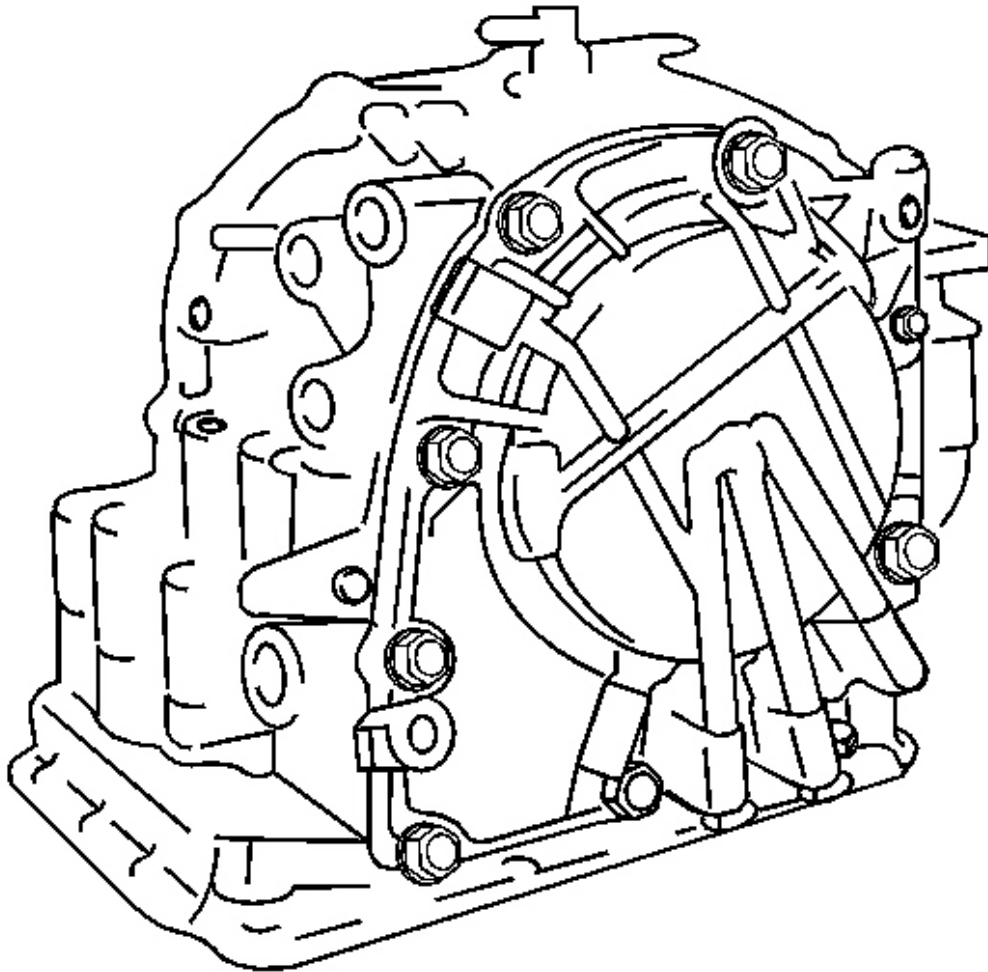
Transaxle Rear Cover, Transaxle Case & Bolts
